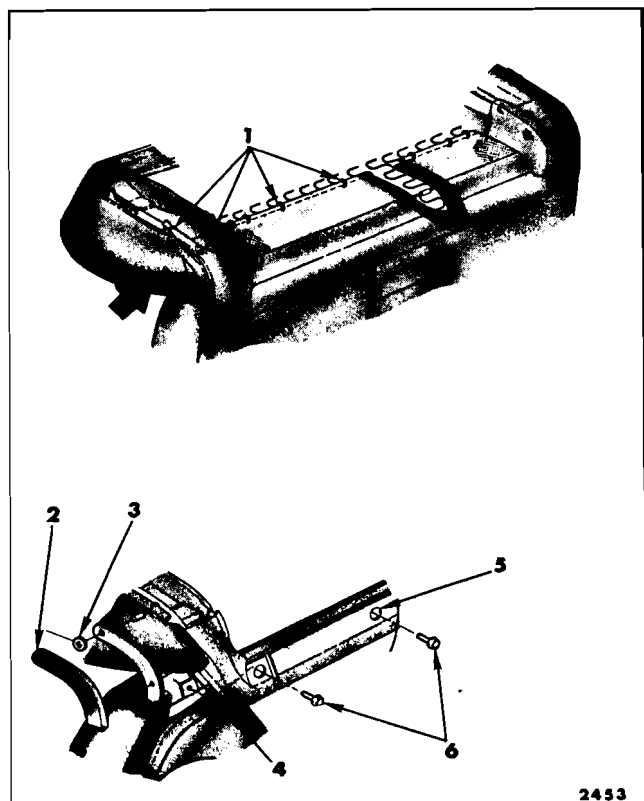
Seat Back Removal (Right or Left) - Full Width Notch Down Seat Back
